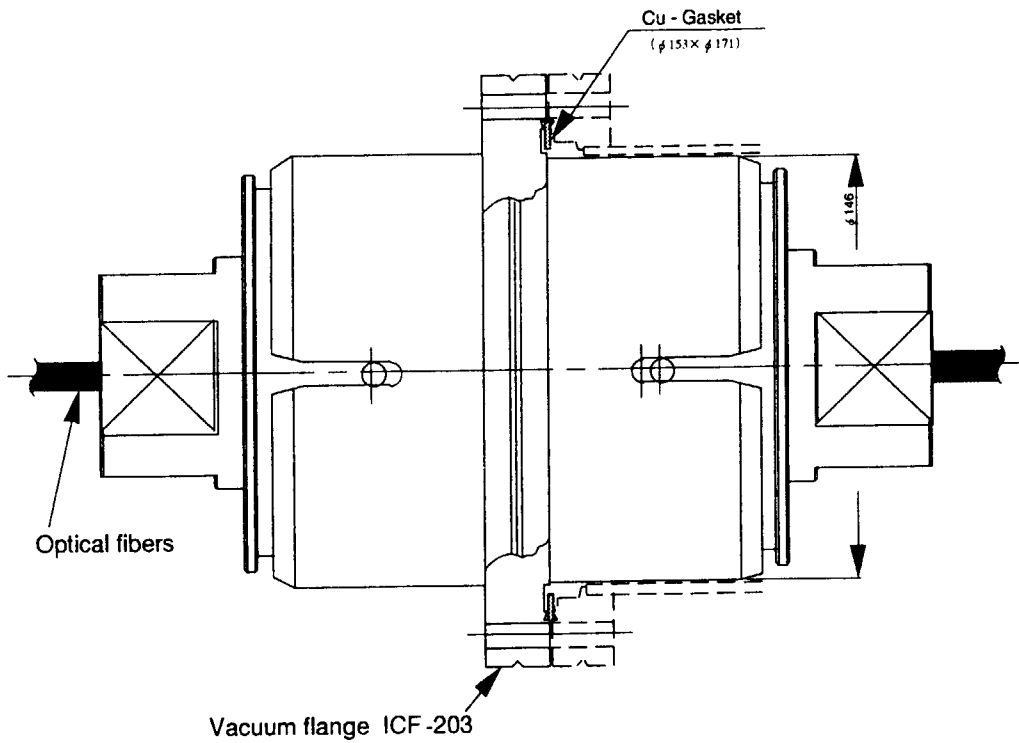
Assembly view of the optical fiber feed through.
